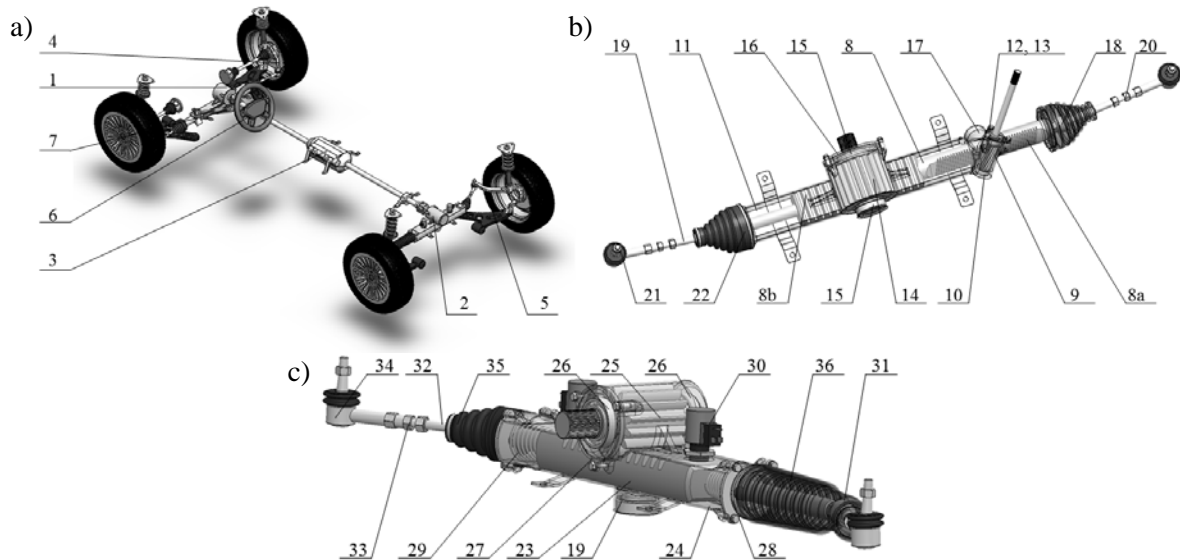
The system with two steering axles: a) general view, b) front steering gear, c) rear steering gear: 1-front steering gear, 2-rear steering gear, 3-shaft with a clutch, 4-front steering knuckle, 5-rear steering knuckle, 6-steering wheel, 7-steering column, 8-rack, 8a-main tothing, 8b-additional tothing, 9-main pinion, 10- angular contact ball bearing, 11-casing, 12-regulation shim, 13-main gear cover, 14-output shaft cover, 15-ball bearing, 16,27-cover, 17-slide, 18,31-rod socket, 19,32-tie rod, 20,33-M12 nut, 21,34-tie-rod end, 22-rubber cover, 23-rear rack, 24-rear casing, 25-input shaft, 26-ball bearing, 28-side cover, 29-spring, 30-electro-lock, 35-short rubber cover, 36-long rubber cover
